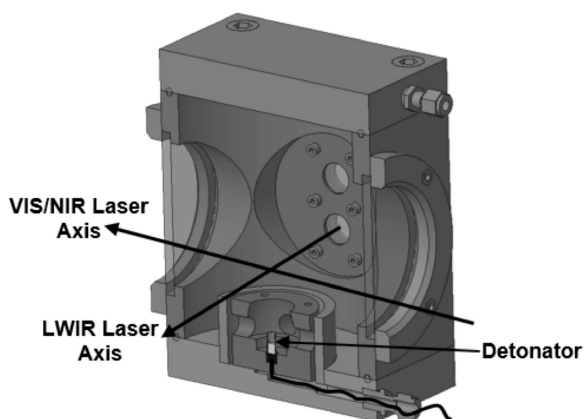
Cutaway CAD rendering of the explosive blast chamber. Detonator is shown in center.
